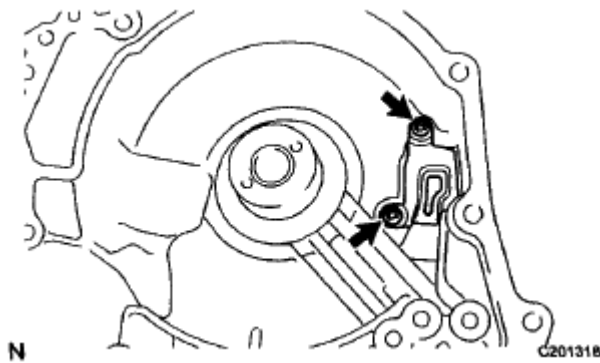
Locating Rear Transaxle Cover Sub-Assembly And Screw
